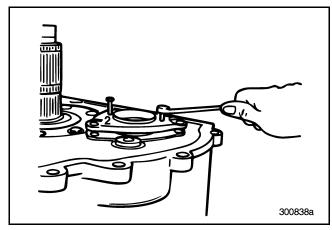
Removing No. 2 Front Countershaft Rear Bearing Cover (T313L/T318L Shown)
